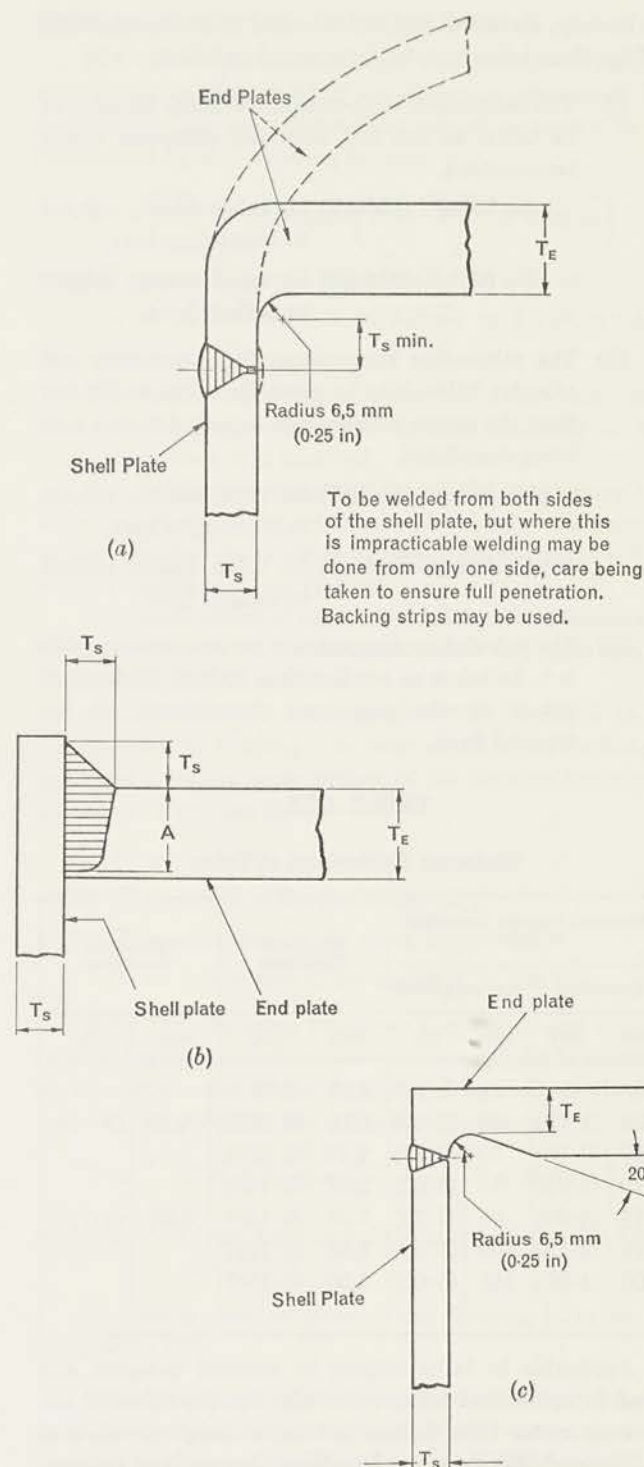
TYPICAL METHODS OF ATTACHMENT OF HEADER END CLOSURES
